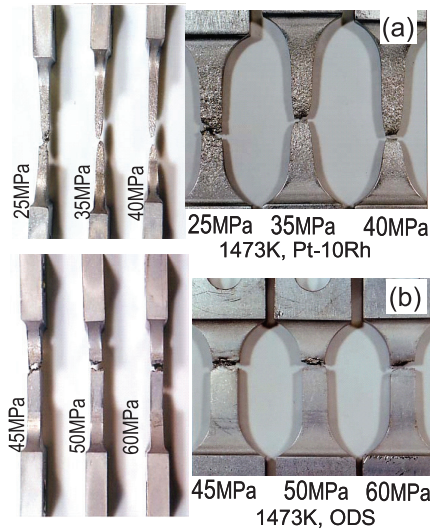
Appearances of specimens after fatigue tests at 1473 K.
